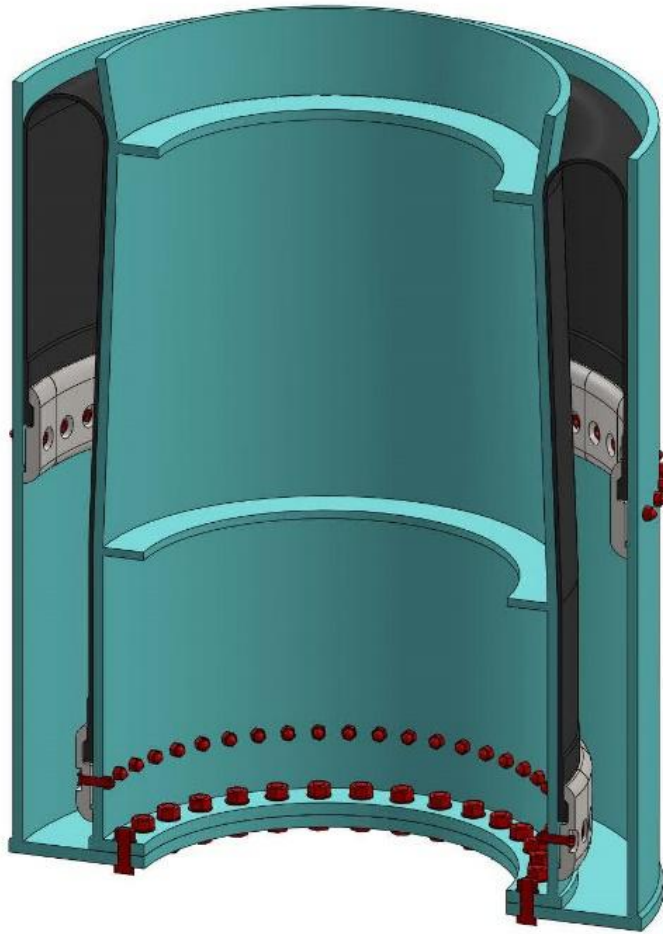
SECTION VIEW OF INSTALLED MEMBRANE
